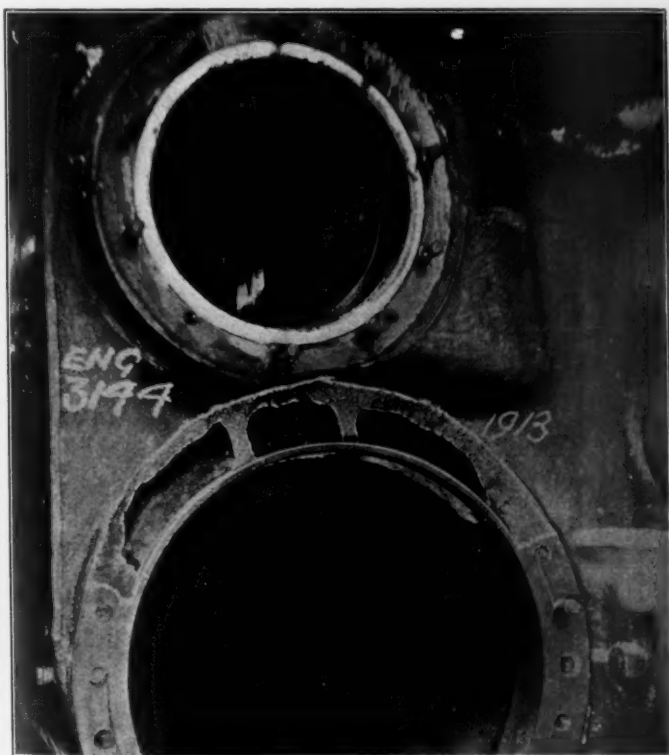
Broken Cylinder Repaired by Arc Welding
